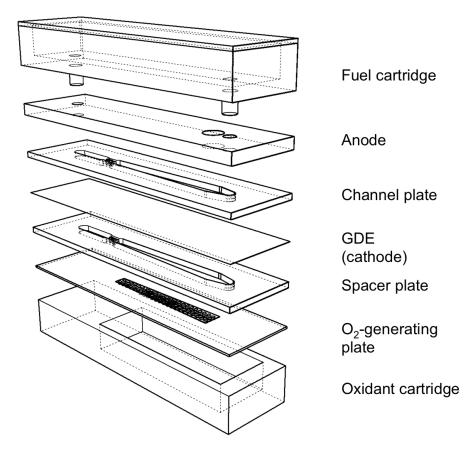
Drawing of the fuel-cell system in exploded view, showing all the solid components. The anode is machined from a graphite plate; the cathode is a commercially available gas diffusion electrode; and the O_2 -generating plate is micromachined from silicon. Other components are machined from chemically inert polycarbonate sheets and blocks.
